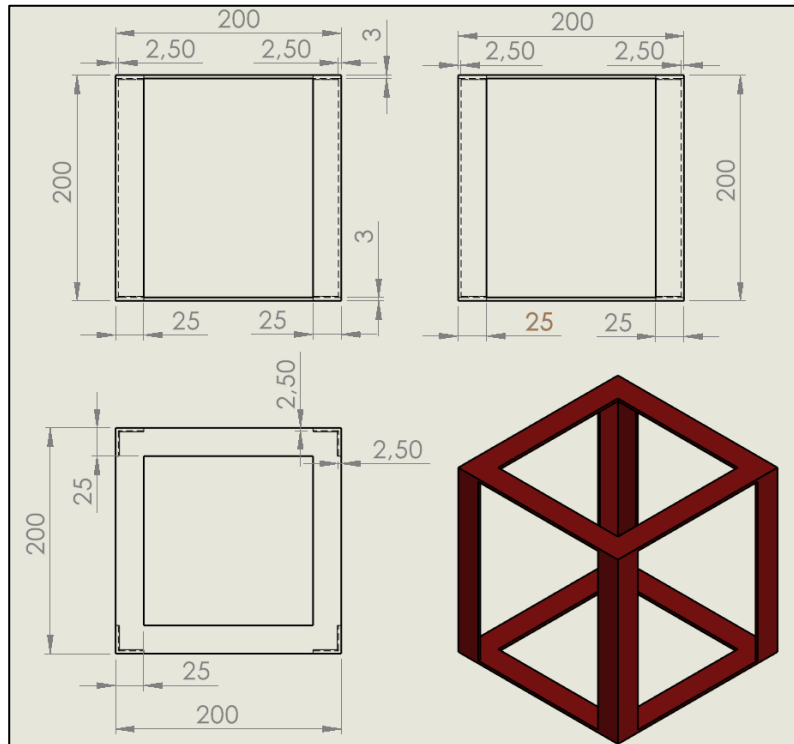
Technical drawing of the hollow cube artificial reef object (in millimeters)
